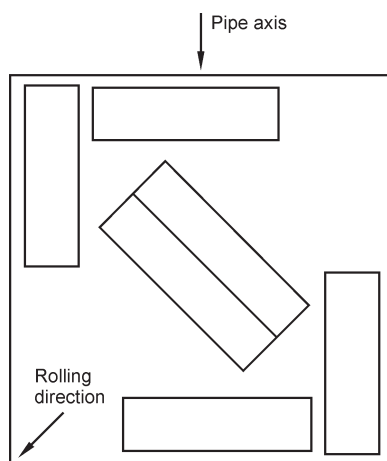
Schematic of cutting of the specimens for mechanical tests
